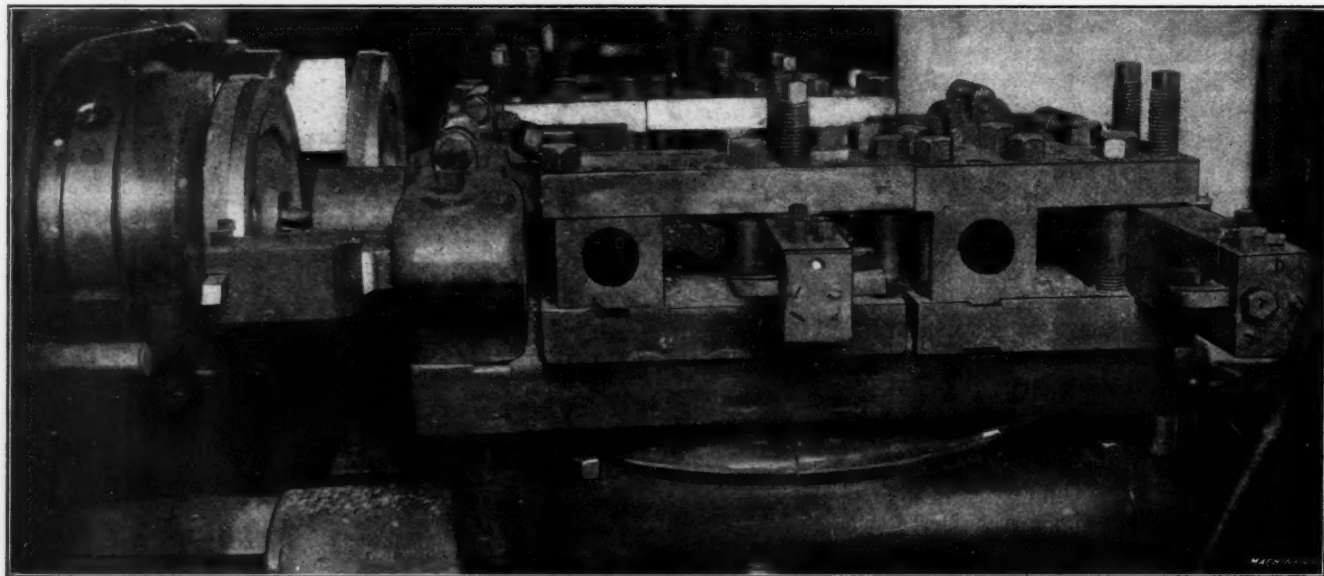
View of Machine in Fig. 10, showing Tool Set-up for machining Flywheels
